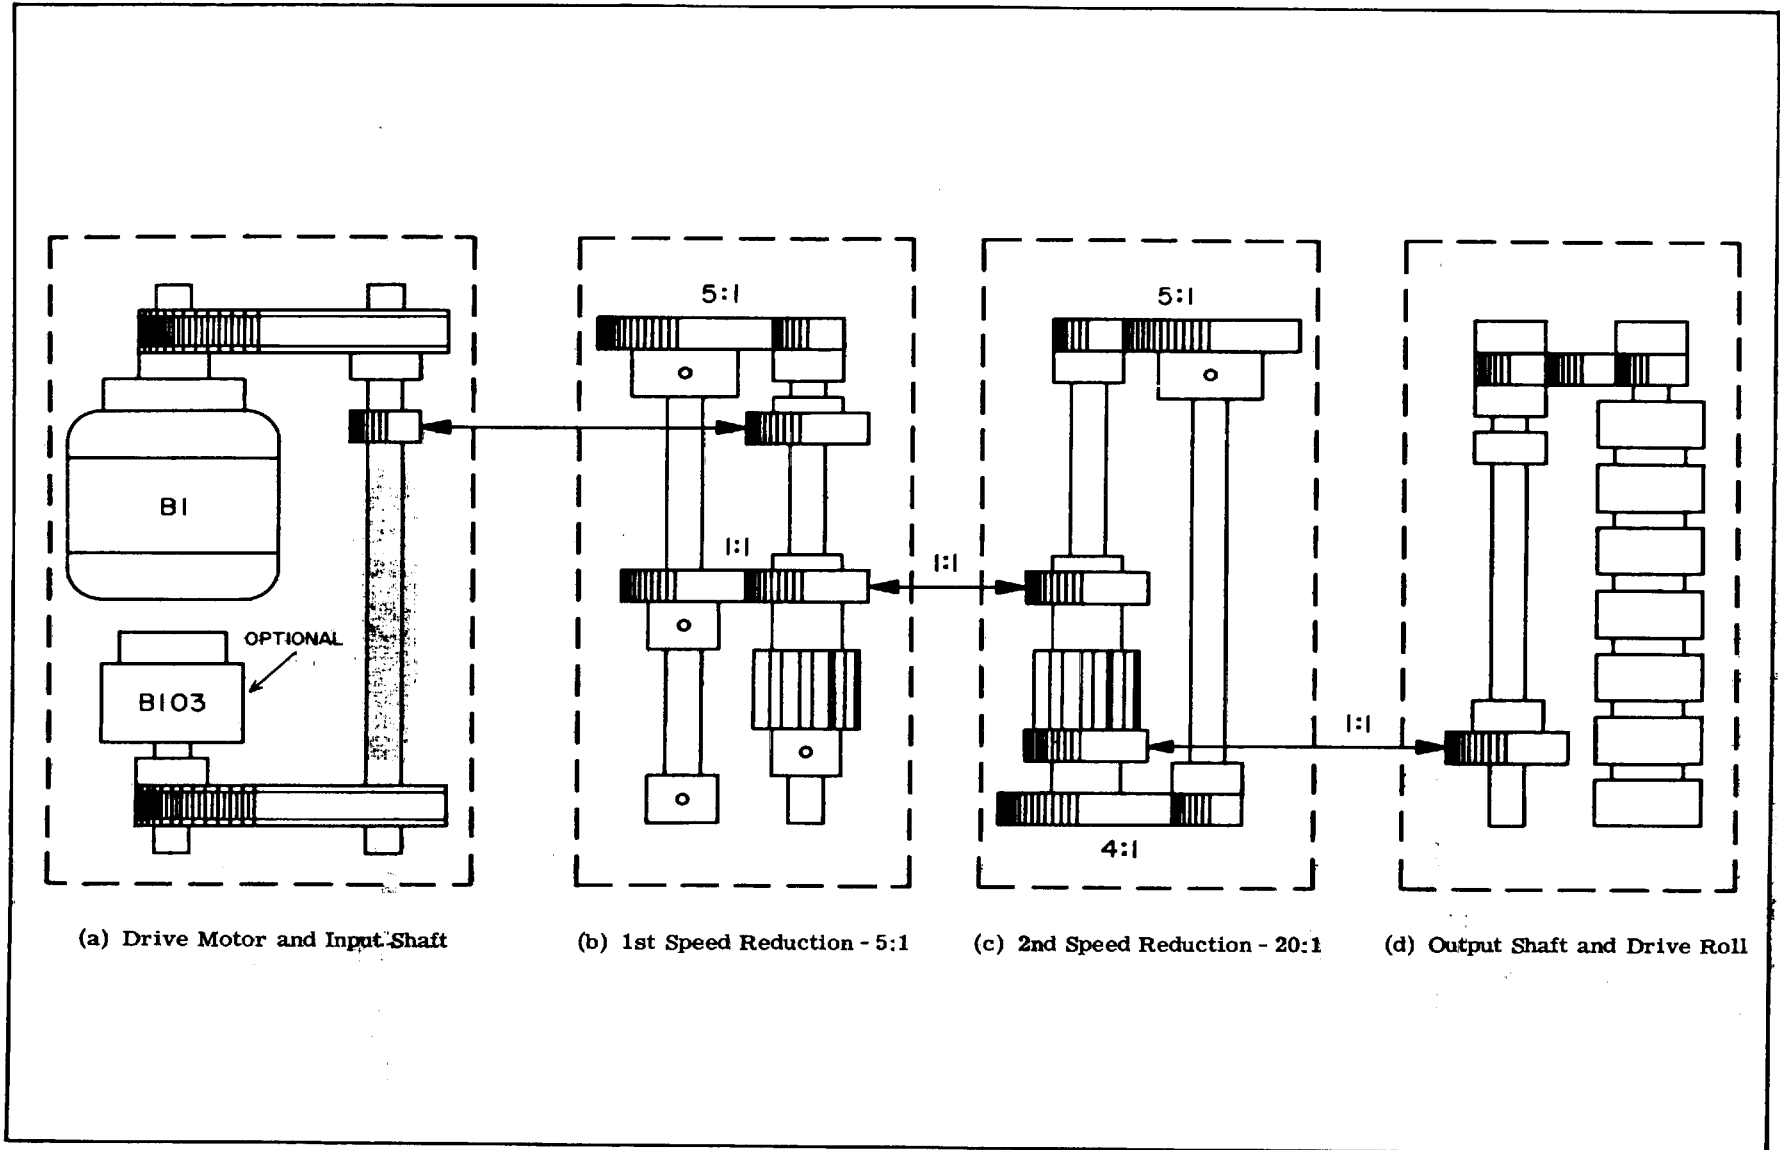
Chart Drive Motor and Speed Reduction Gears
